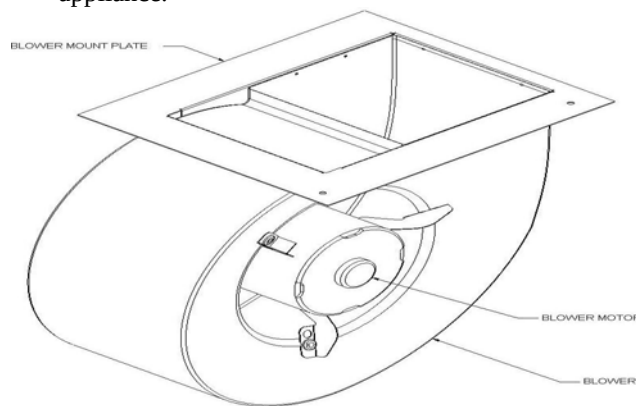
Blower Assembly and Mounting Screw Location – B/S02 / B/S03 / WCW
